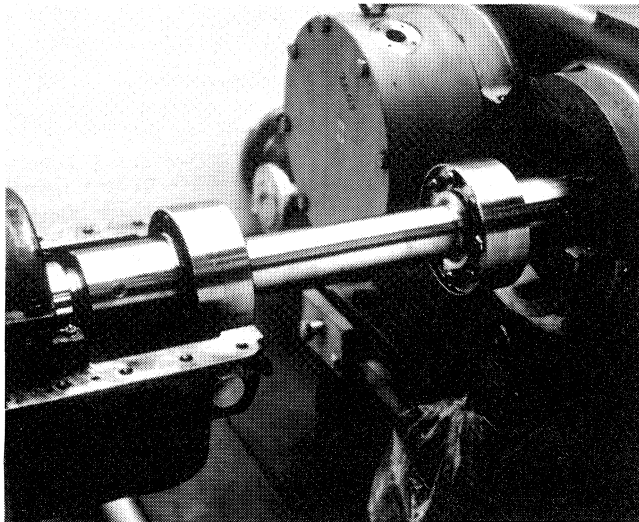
Solid Coupling Installed Between Compressor Shaft and Gear Pinion.
